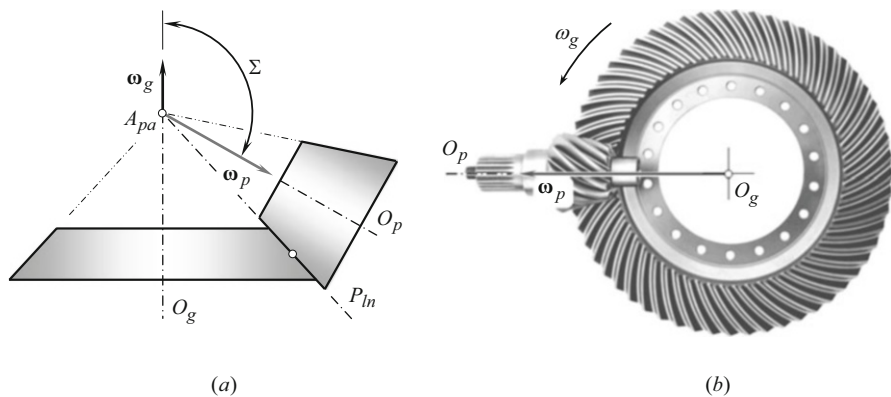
Desirable gear generic surface for an external gear pair that features intersecting axes of rotation of a gear and a mating pinion
